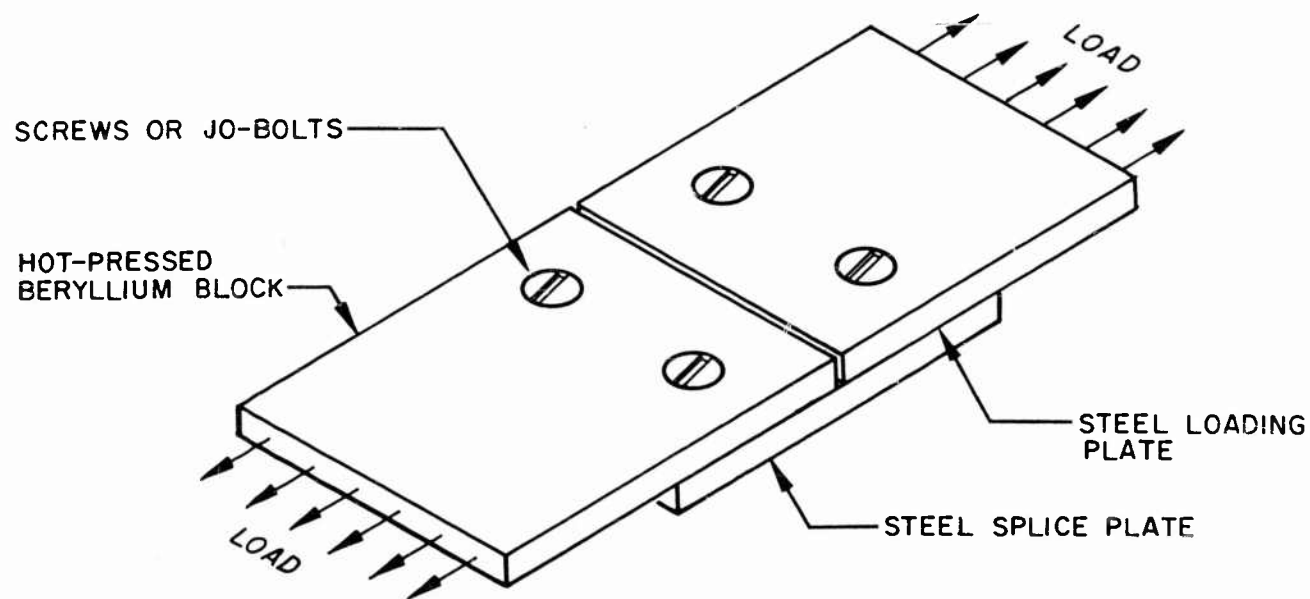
Arrangement for Beryllium Axial Fatigue Joint Tests
